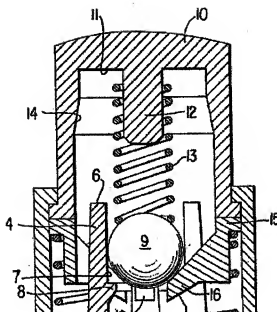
of *Hollweck* depicts a resetting device including a housing (1) and a push button (10) slideably arranged on the housing (1). The lower end of the push button (10) has a flanged portion (not numbered) that interacts with a contact face of the housing (1), the contact face extending radially inward from the side-wall of the housing. The inside of the contact face defines the recess through which the pushbutton (10) extends. The Examiner contends that the radially inner surface of the contact face is the claimed first cylindrical guide. However, there is no additionally extending surface that extends from the rear of the side of the housing (1) of *Hollweck*. There is no additionally cylindrical guide that is formed and that extends in the required direction and at the location identified by the Examiner.
